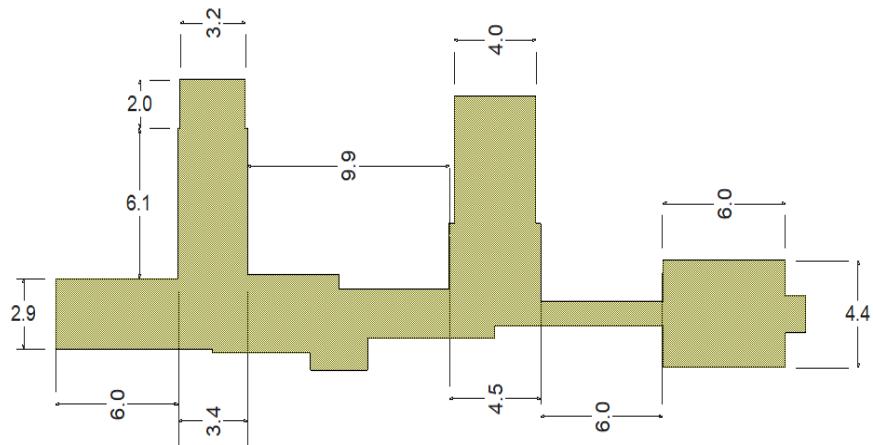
Prototype 2 output layout rough dimensions (mm)
